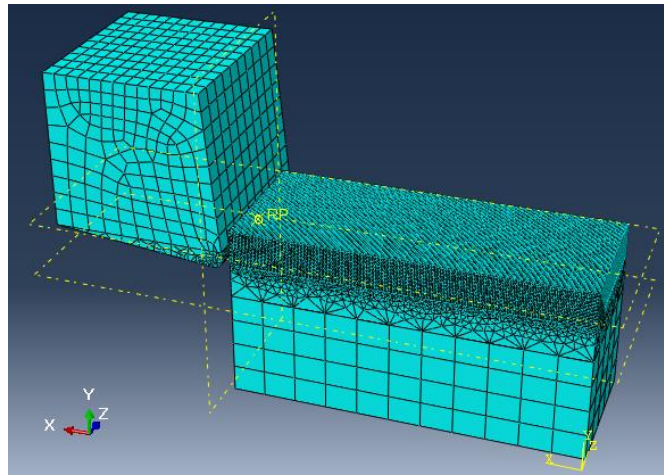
Assembly of the cutting tool and the workpiece discretized into finite elements.
